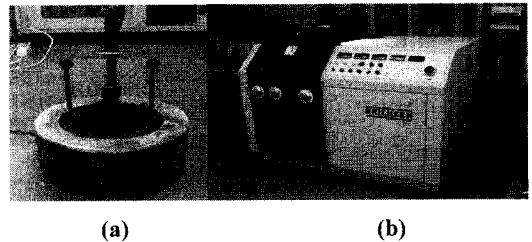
Testing machine and tools for circular cup deep drawing(Erichsen Co.)
